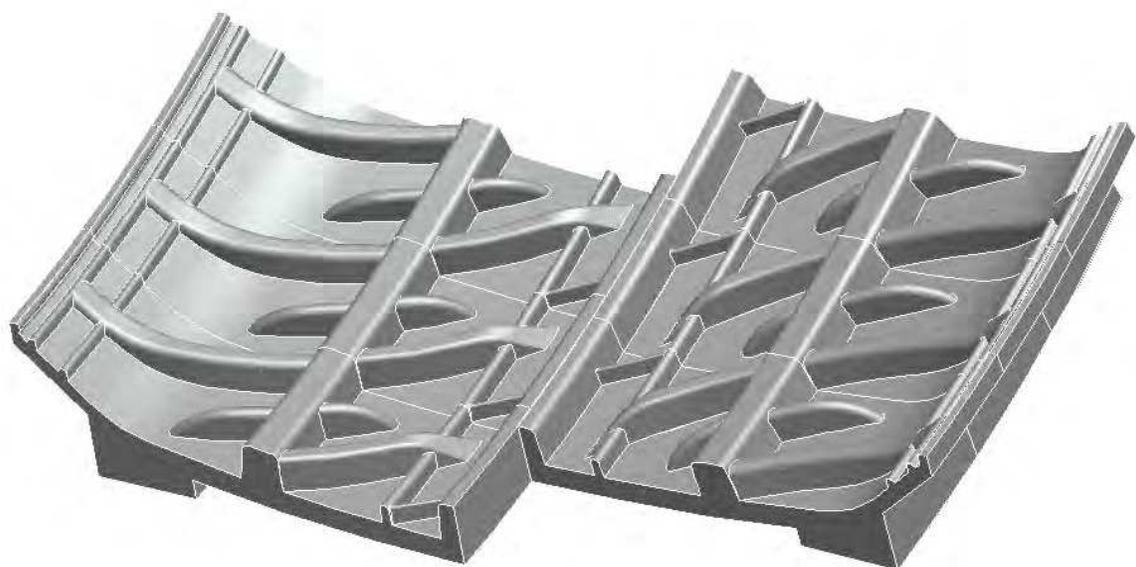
Assembly of one-pitch-segments makes tread ring (segments).
